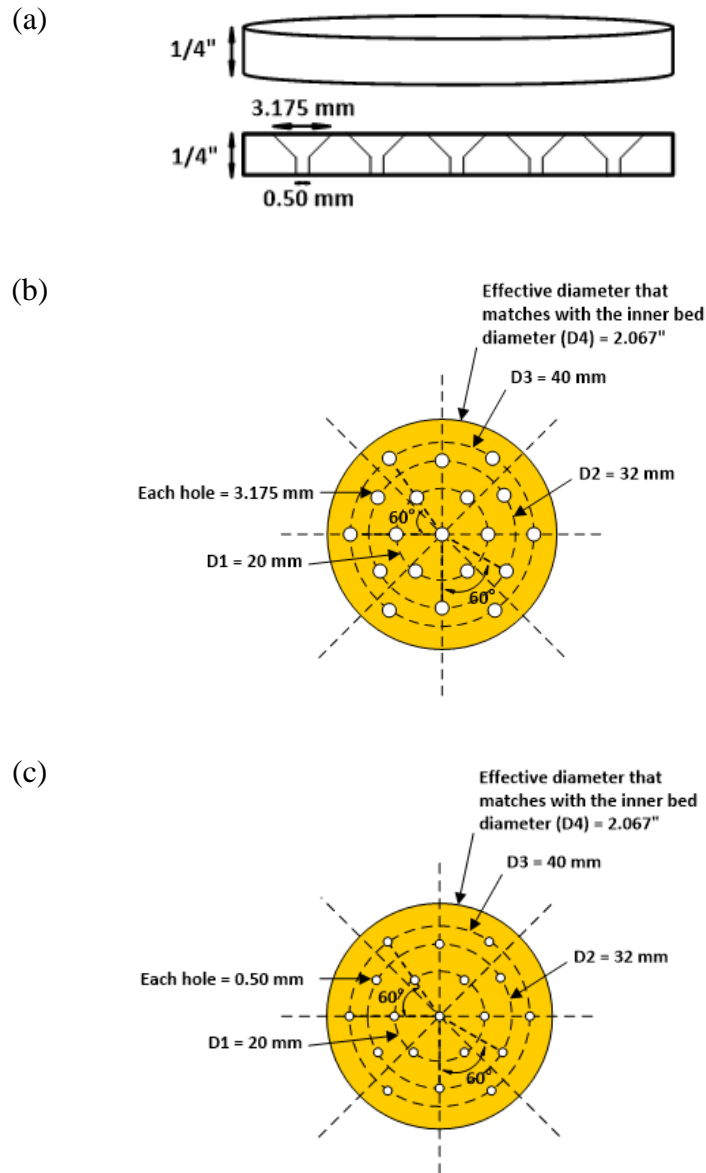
Schematic drawing of the perforated distributor plate: (a) side view, (b) Top view, (c) Bottom view
